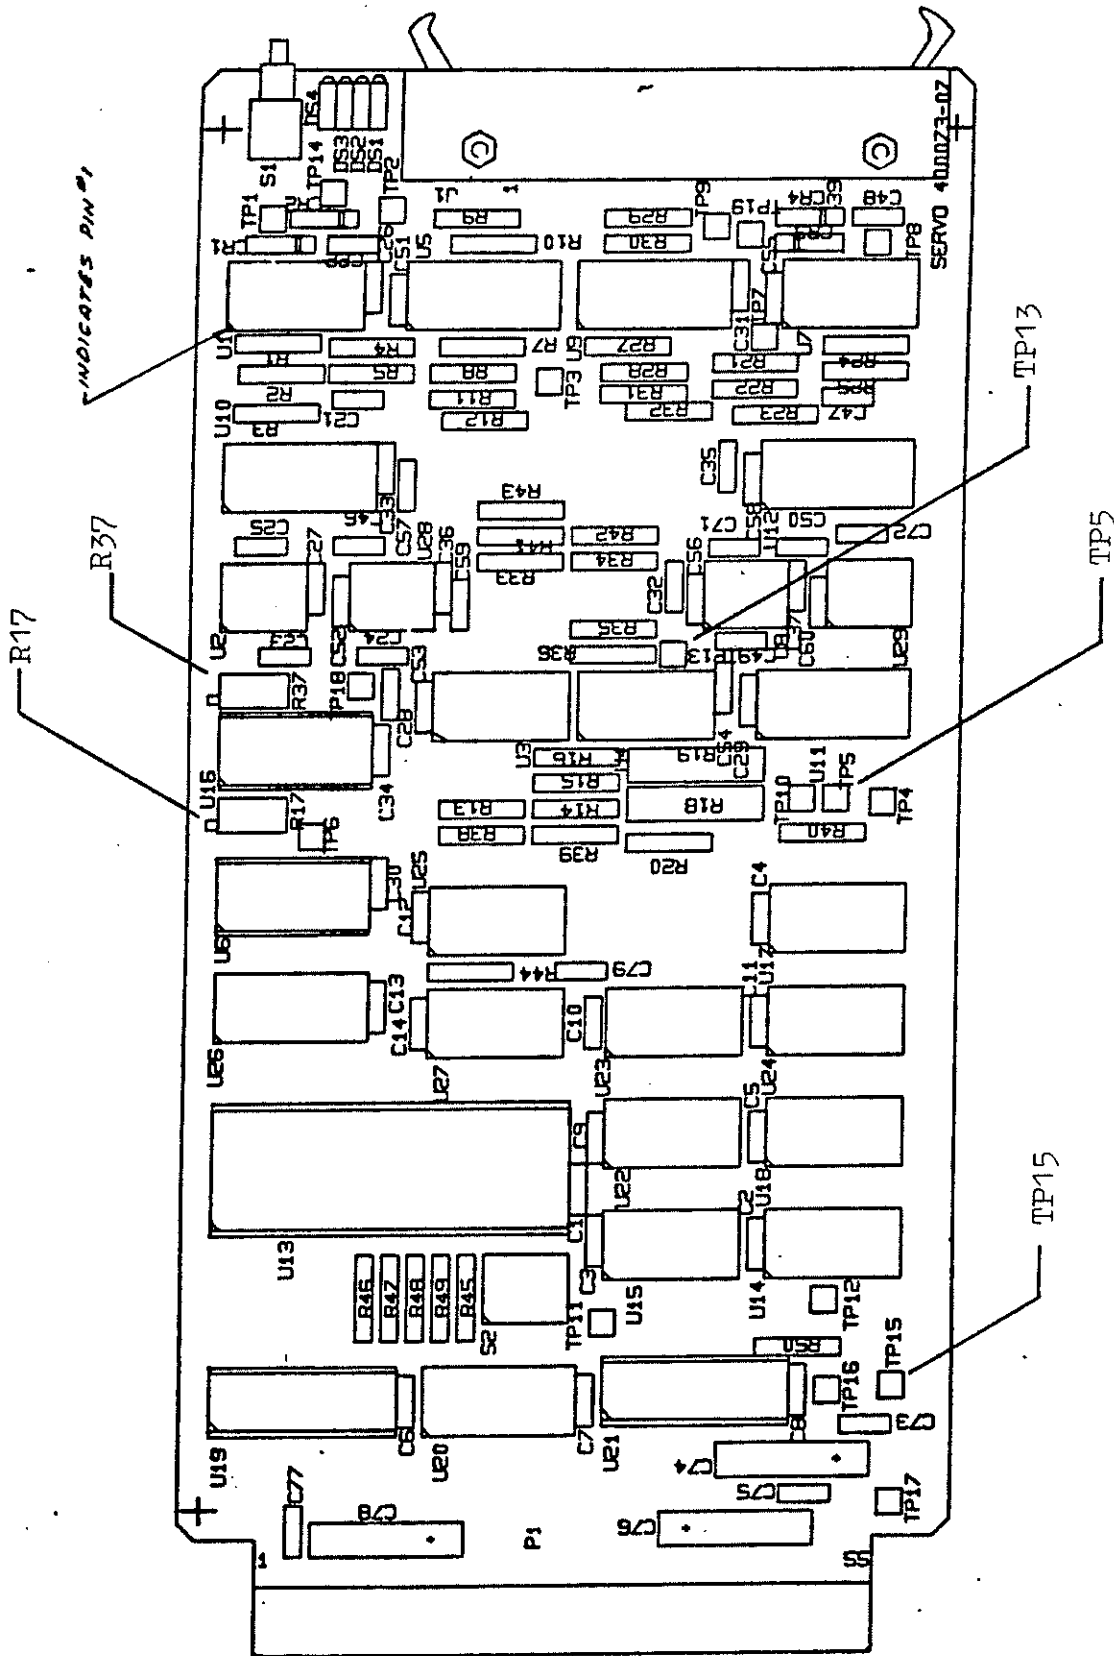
A. Circuit Card Assembly Layout, Bearing Identification
